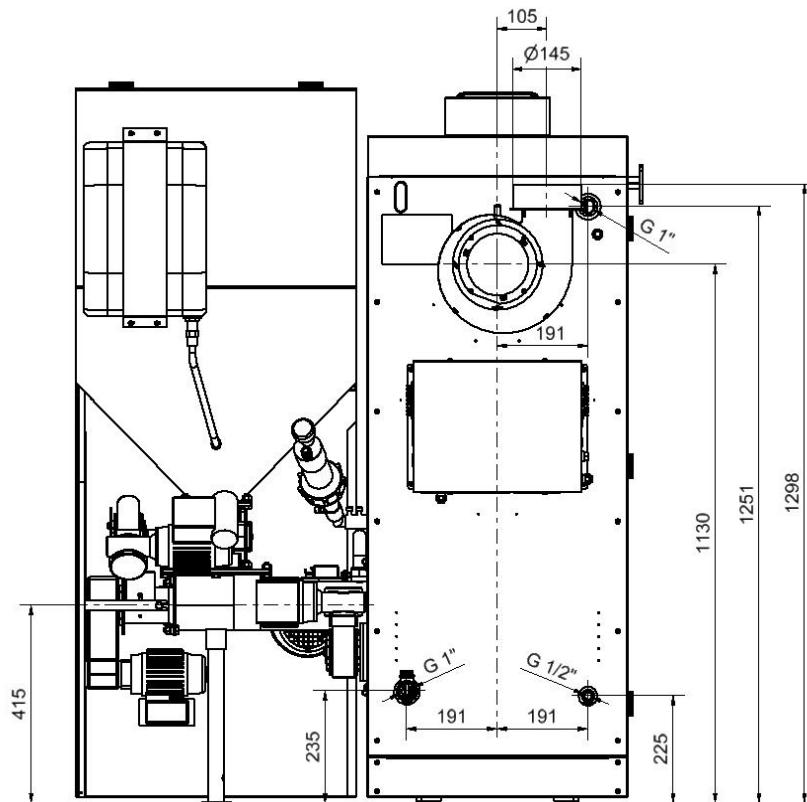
Connecting dimension of BENEKOV R26 boiler
